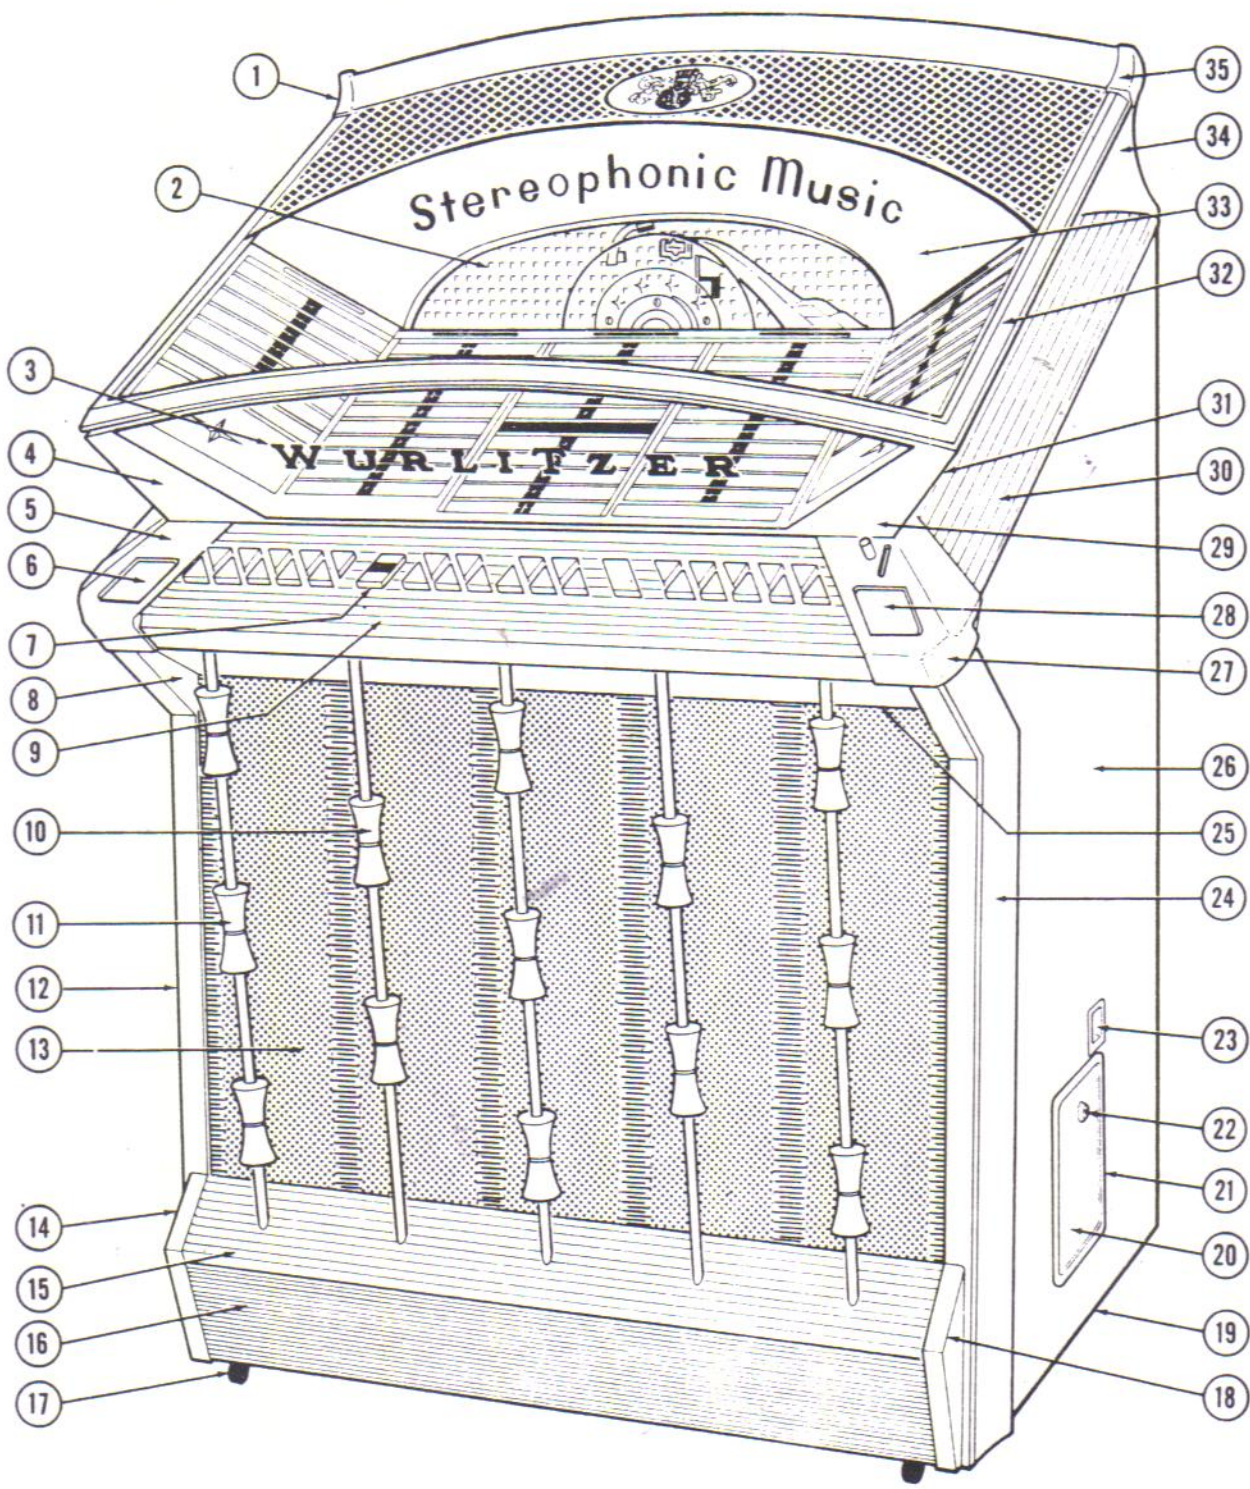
TRIM AND MOUNTING - FRONT VIEW
